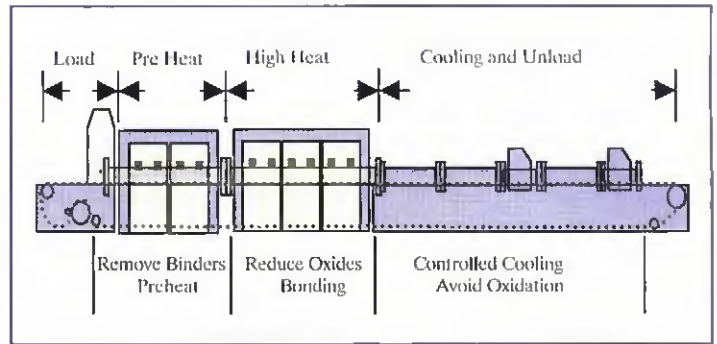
Schematic of a straight through, continuous belt furnace.
